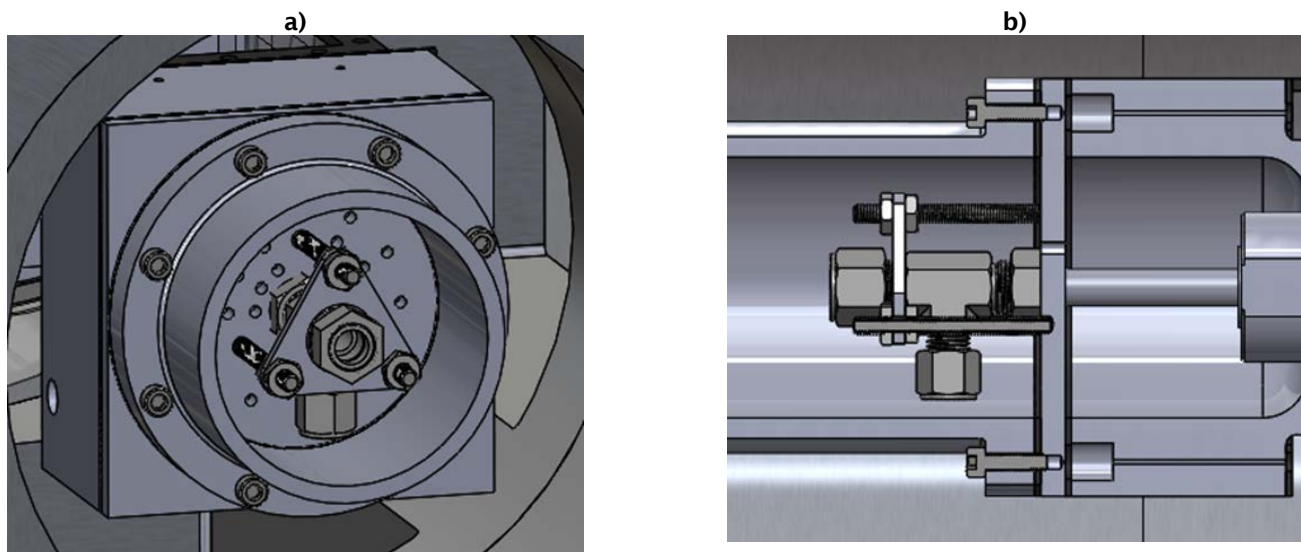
New adjustable fuel injector holder. a) Isometric view of the adjustable triangular holder and b) side section view that includes the fuel injector.
